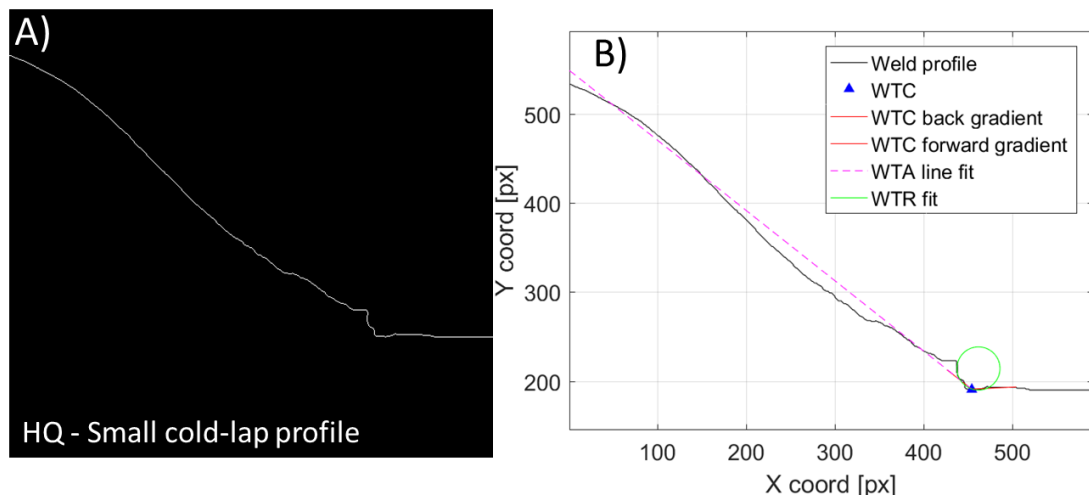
HQ weld profile with small cold-lap defect - A) original single-pixel weld profile; B) weld toe geometry extraction after MATLAB processing.
